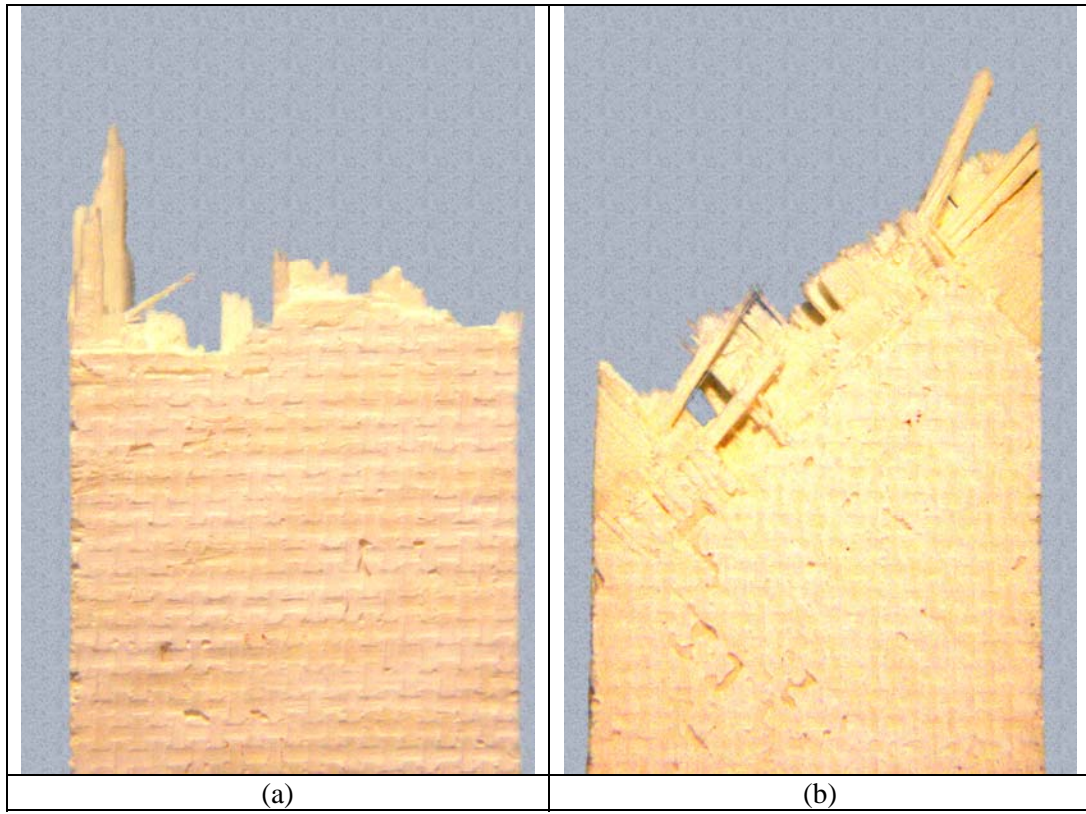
Fracture surface of tensile tested Nextel™720/AS-0 at 1100°C (a) 0°/90°, (b) ±45°.
